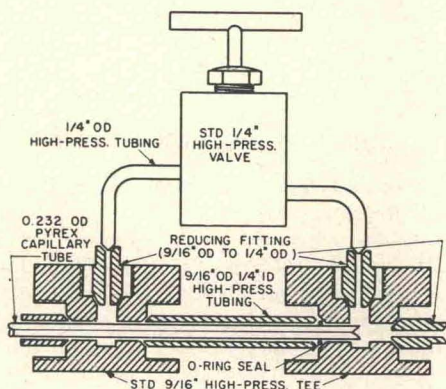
DETAILS OF CAPILLARY TUBE SEAL AND BY-PASS VALVE ASSEMBLY.
